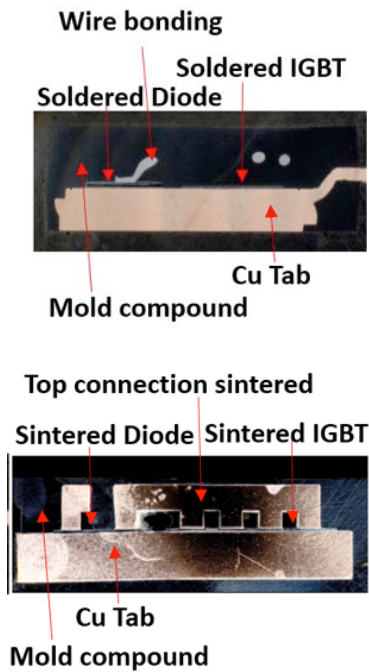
Top: Standard packaged component cross-section image. Bottom: New, Ag-Sintered packaged component, solder free and with Cu clip for the die top side connections.
